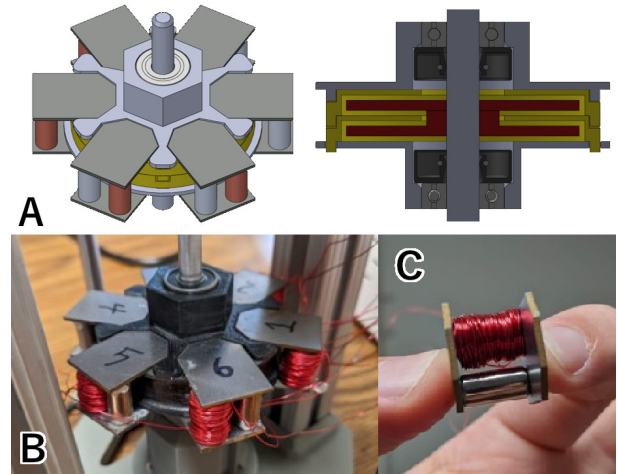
An assembled MRF Clutch with six EPMs. A) 3D Model of the clutch with an isometric and cross-sectional view. B) The physical, assembled MRF Clutch in the torque-testing apparatus. C) A single EPM, viewed head-on to see the two magnets and coil.
